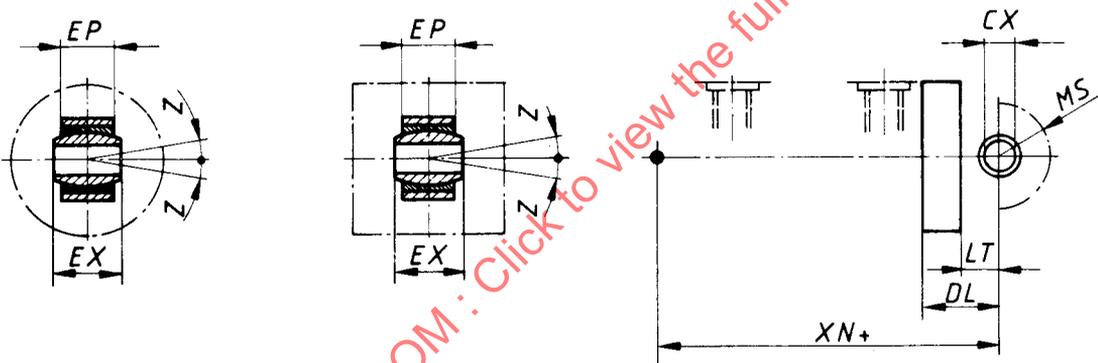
(MP 6) Cap detachable eye with spherical plain bearing
